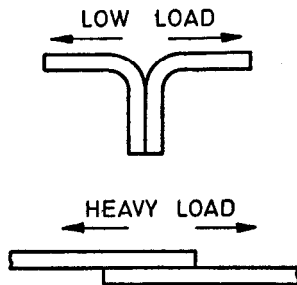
RECIPROCAL POSITION OF LOADING DIRECTION AND WELDING EDGE
